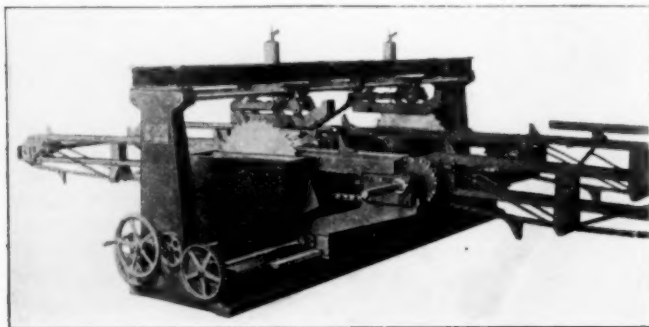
TIE-SAWING OR TRIMMING MACHINE
